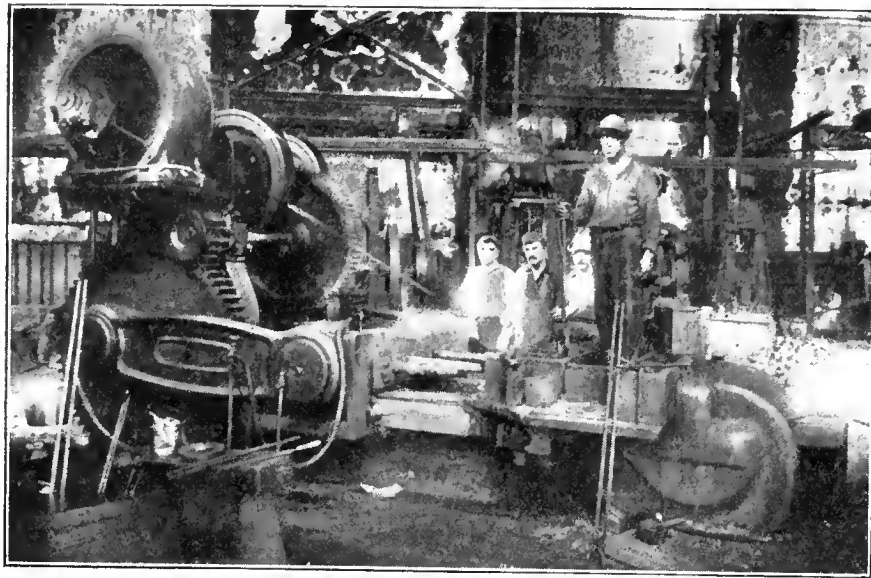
BULLDOZER USED IN SECOND DRAWING OPERATION OF 3.3. SHRAPNEL SHELL FORGINGS.
